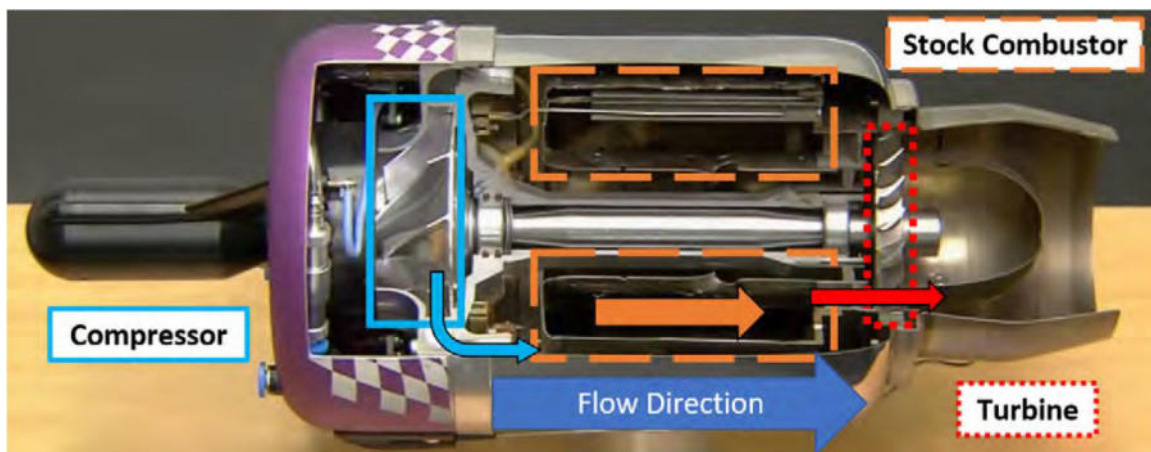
Cross-sectional view of the stock JetCat P90-RXI-B engine [3]
